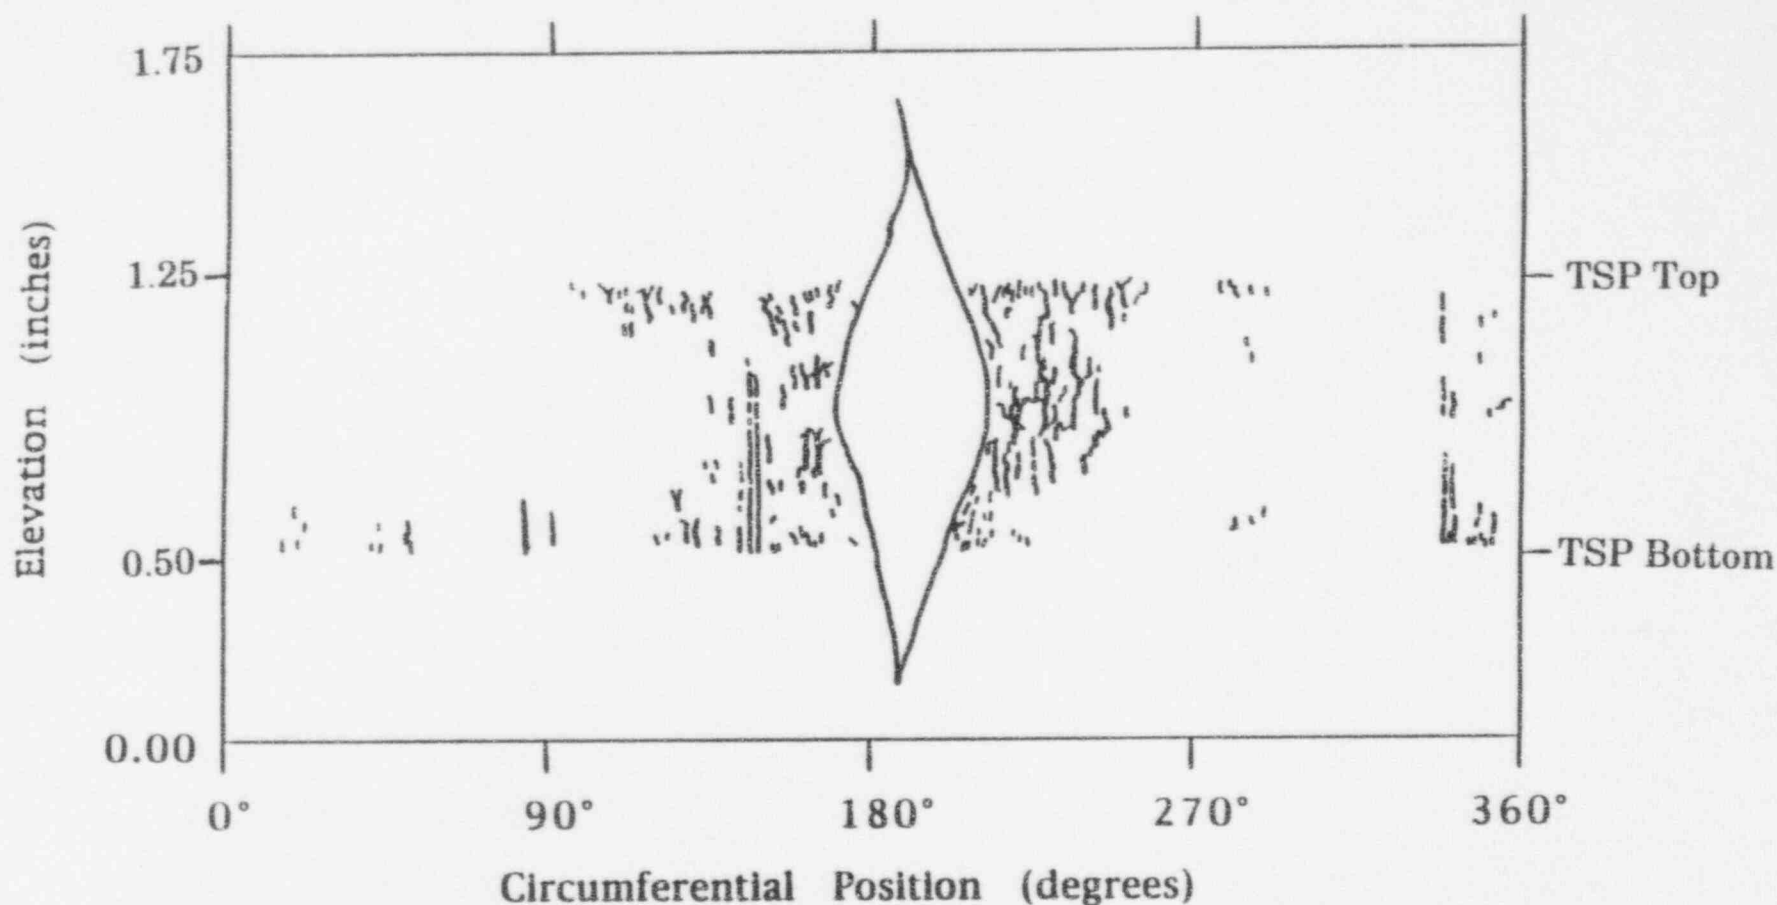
Sketch of the OD surface crack distribution found at the third tube support plate (TSP3) region of Tube R28C42 following burst testing. Also shown is the location of the axial burst opening. (The burst opening extended beyond the TSP crevice region, but the corrosion cracking on the burst fracture was confined to the crevice region.)
